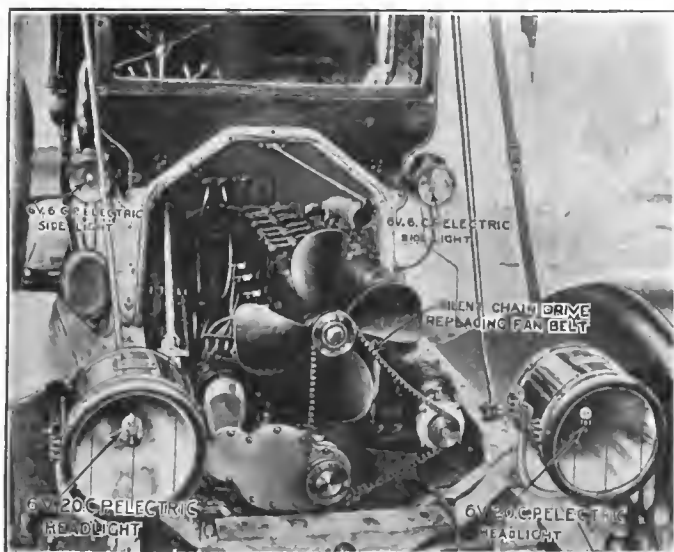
Dynamo and fan driven by a silent chain taking power from a pinion which extends out on the half-time gear shaft
